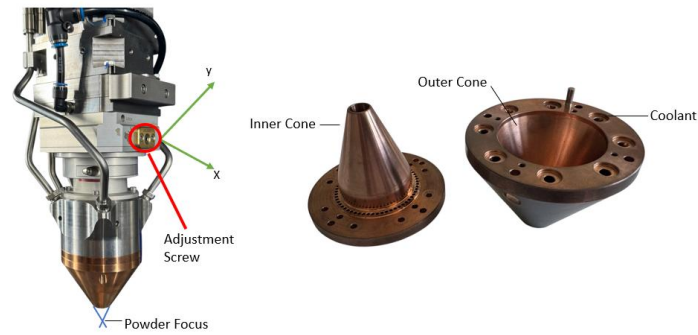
Powder nozzle assembly (left: HS-DED nozzle system; right: disassembled powder nozzle)
